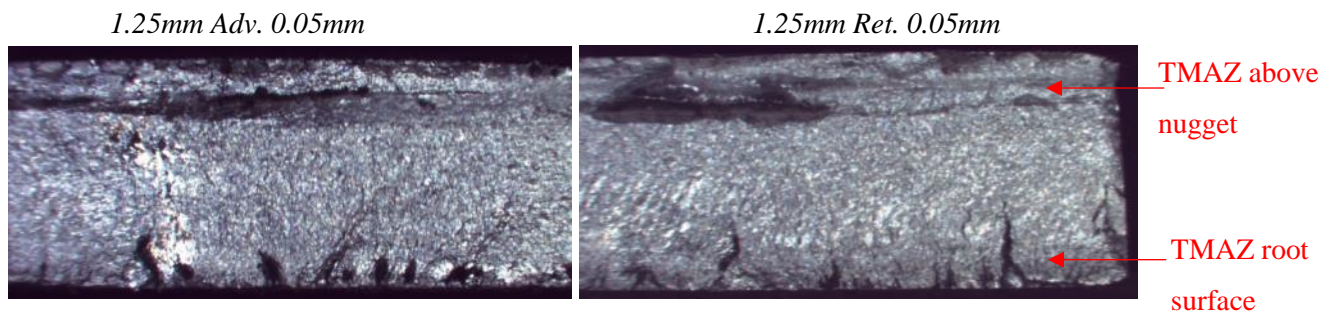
Failure Positions of Offset Tool Friction Stir Welded Samples – 165 MPa Stress Amplitude
